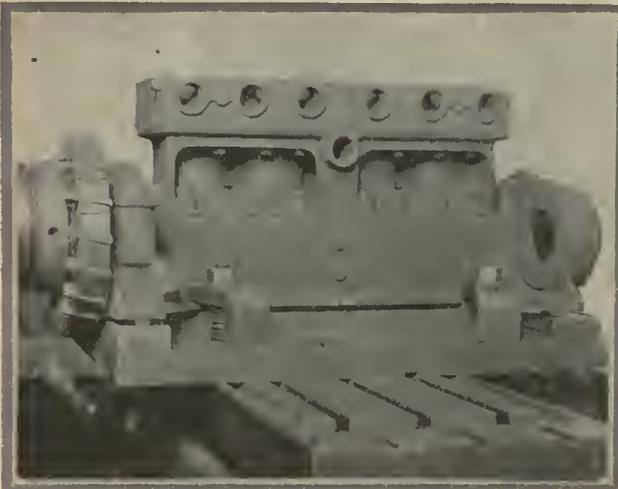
MILLING THE FLYWHEEL END OF CYLINDER BLOCK.
